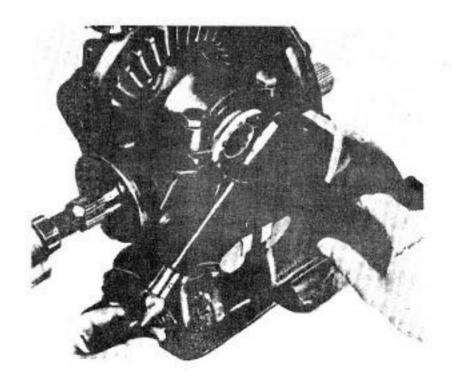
Using special wrench with screwdriver to tighten ring gear adjusting ring.
